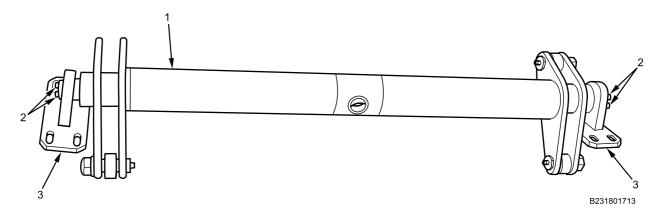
Mounting Brackets Installed on Rear Door Lock Assembly.
